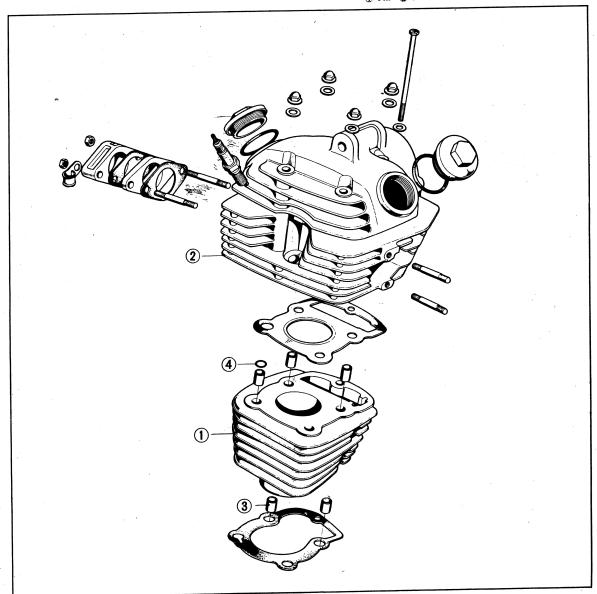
① Cylinder ② Cylinder head ③ Dowel pins ④ O ring
